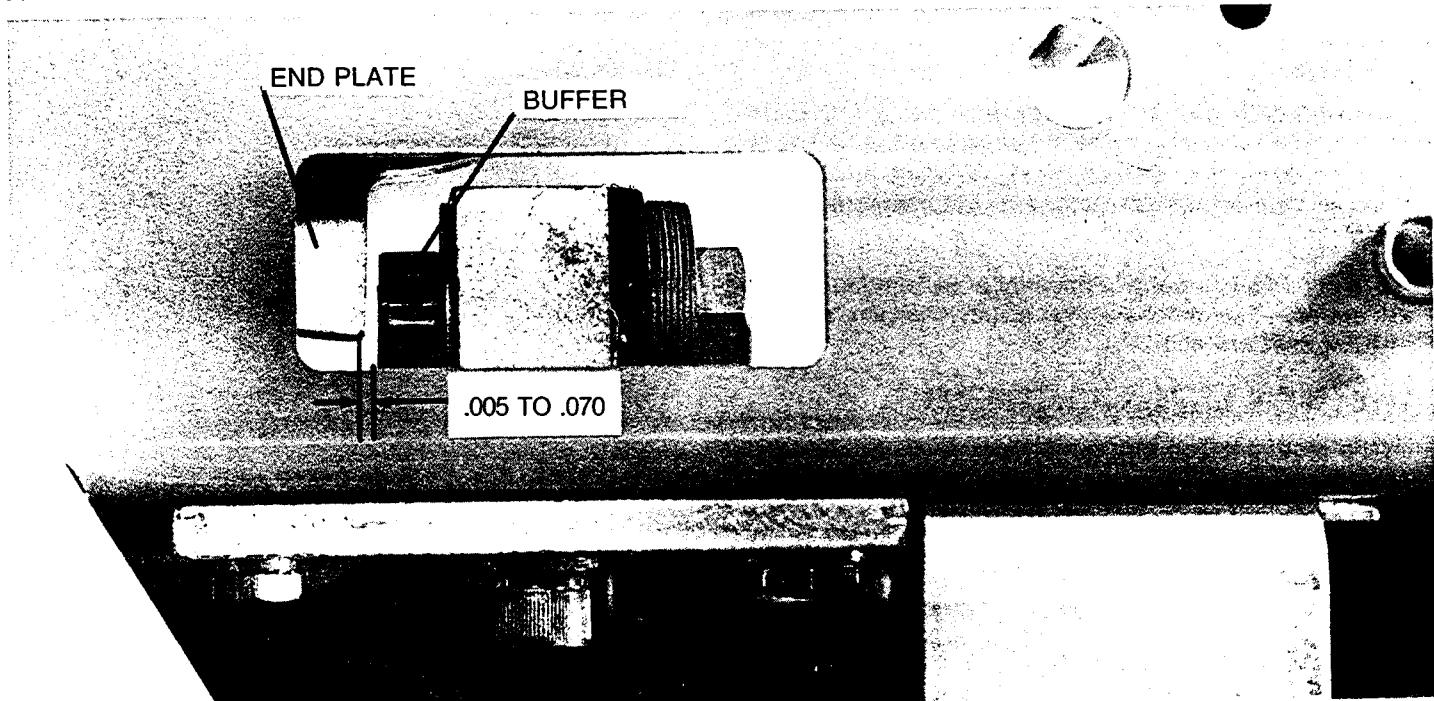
BUFFER-END PLATE RELATIONSHIP—BREAKER CLOSED
